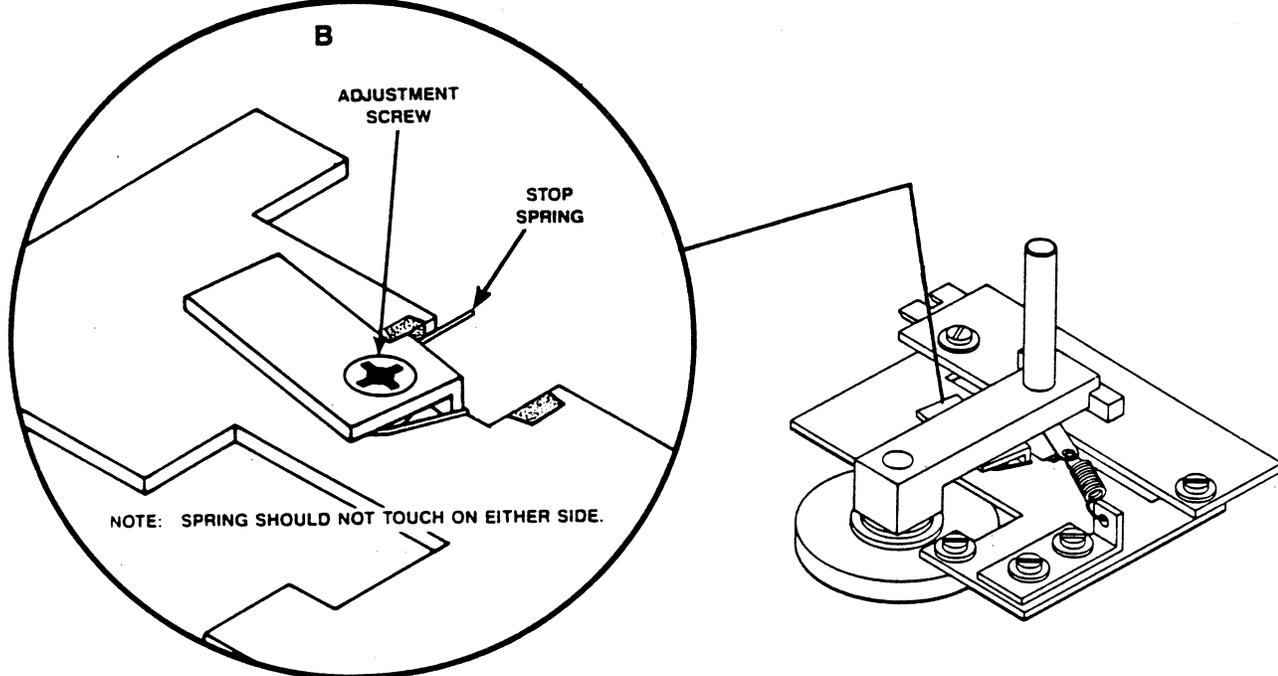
Flutter Dampener Stopper Spring Assembly
